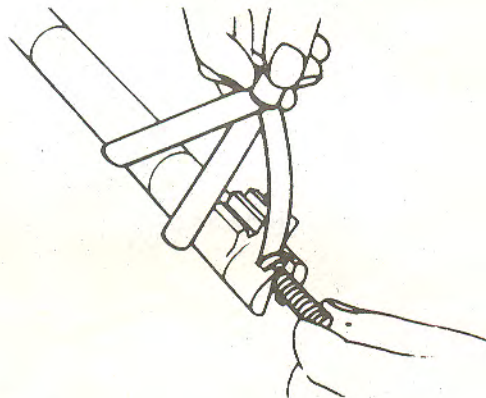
Checking the end clearance between the head of the adjusting screw and the thrust washer in the end of the sector shaft.
